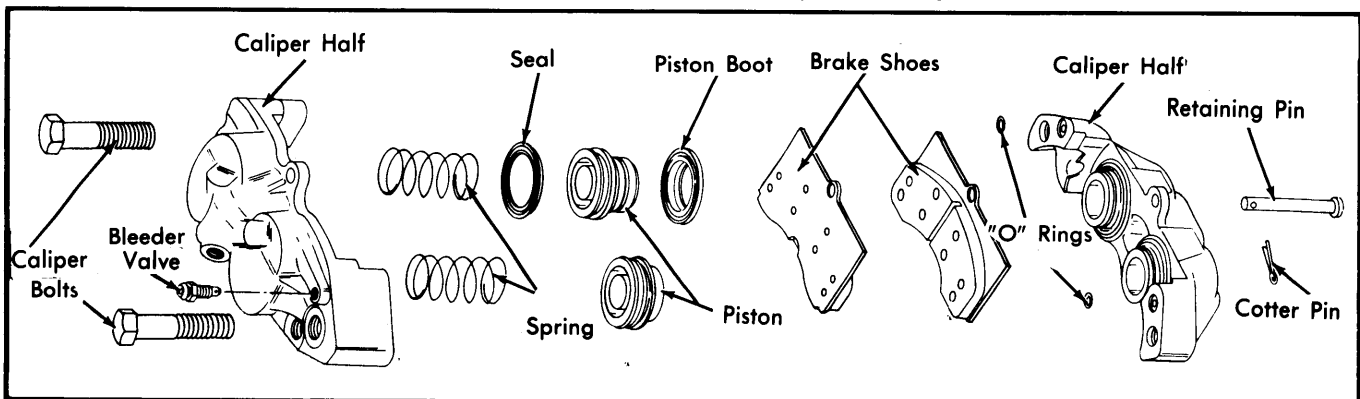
Exploded View of Corvette Four Piston Disc Brake Caliper Assembly
